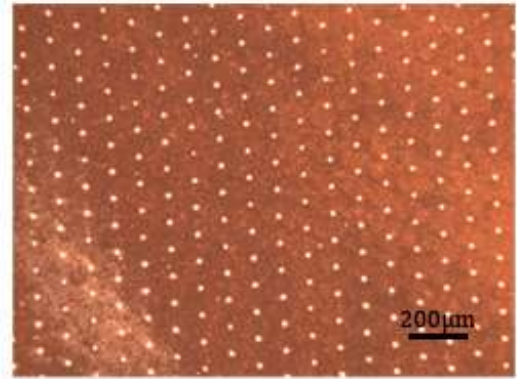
Cu metal sheet fabricated using electroplating techniques
